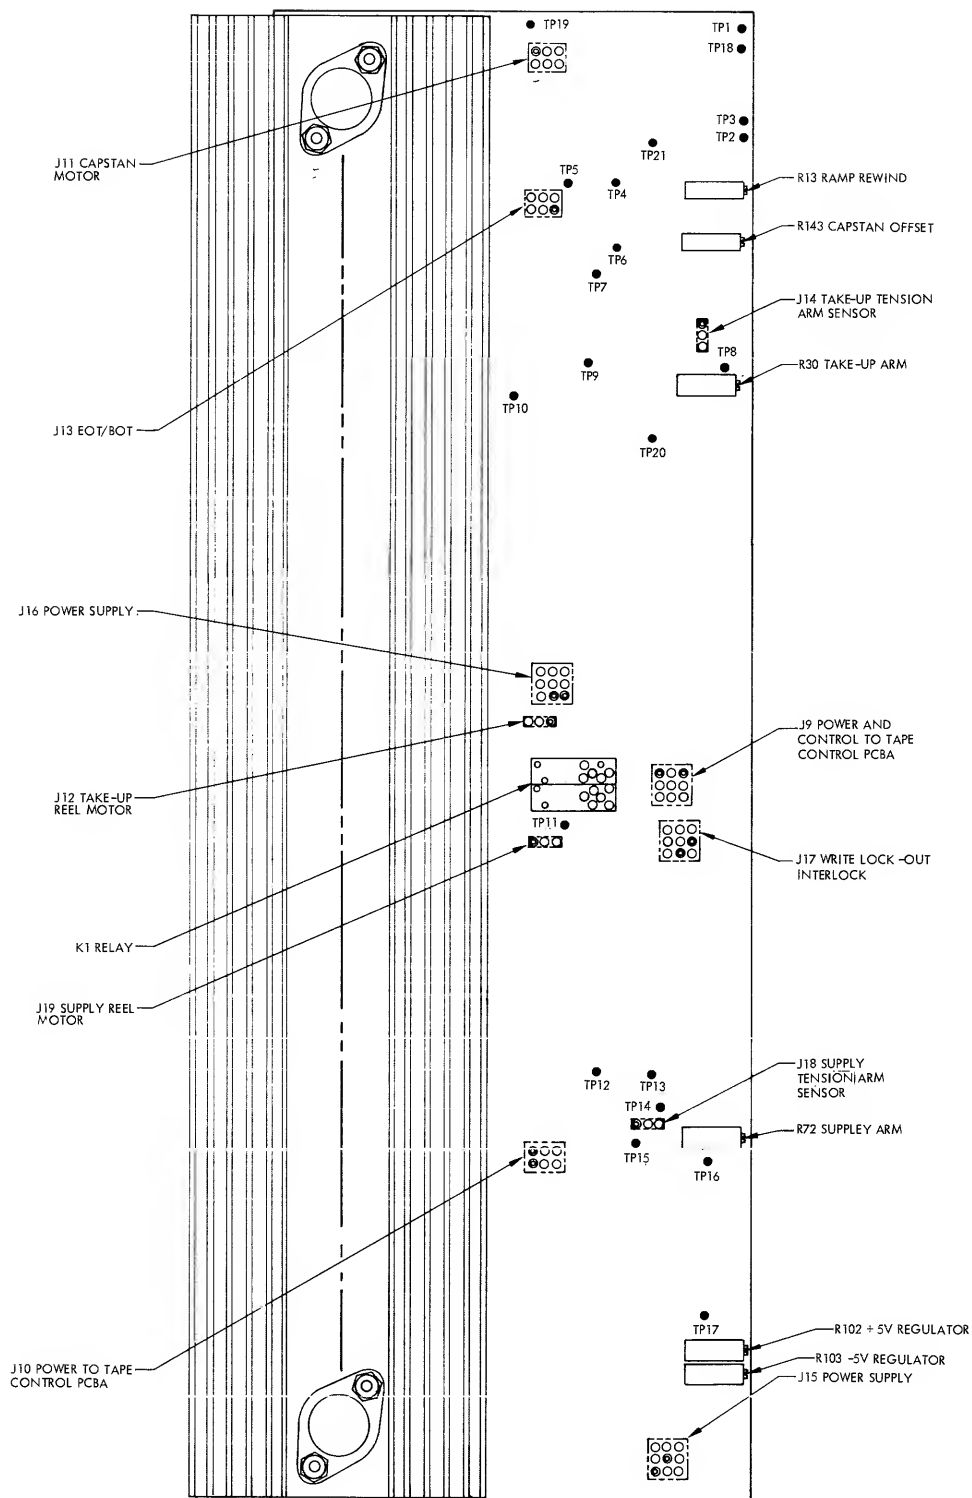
Servo and Power Supply A PCBA, Test Point and Connector Placement
